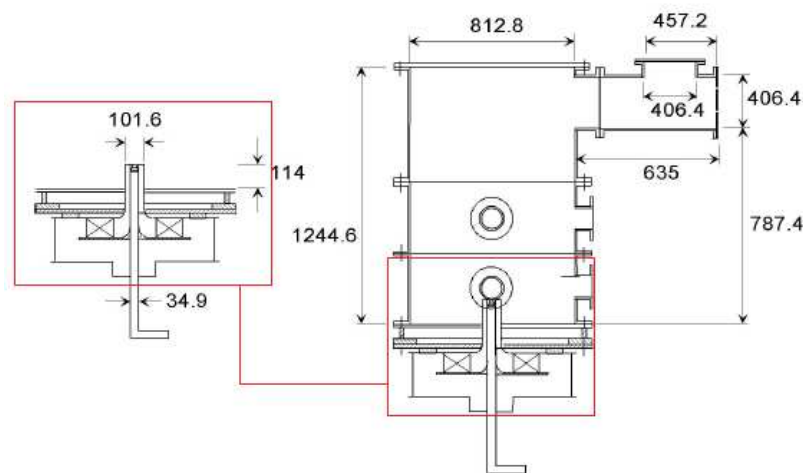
Setup and dimensions (mm) of the NIST flame experiment.
